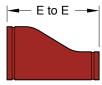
Fabricated Eccentric Reducer (Segment Welded)
